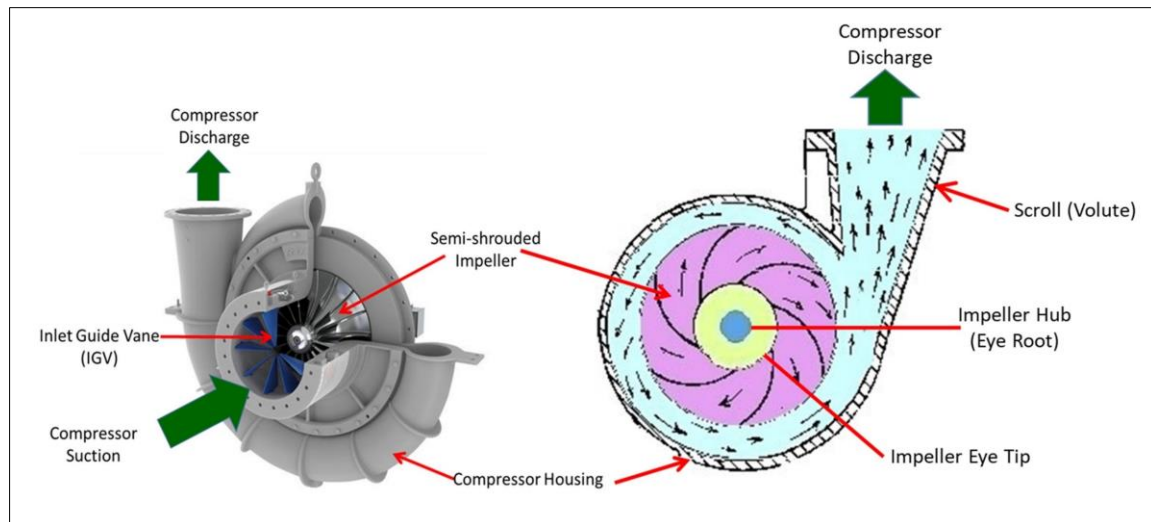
The assembly of a single-stage centrifugal compressor with inlet guide vanes (IGVs)
